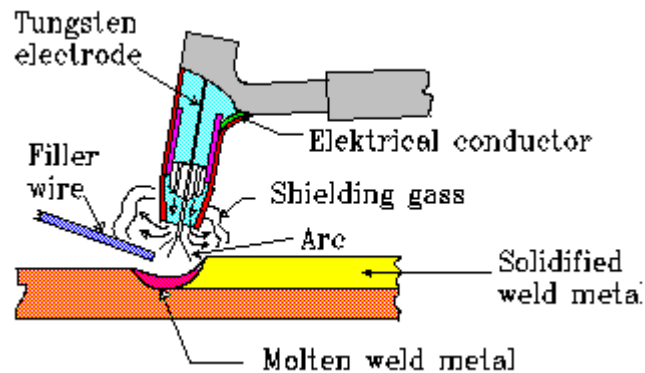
Gas tungsten arc welding (GTAW).
